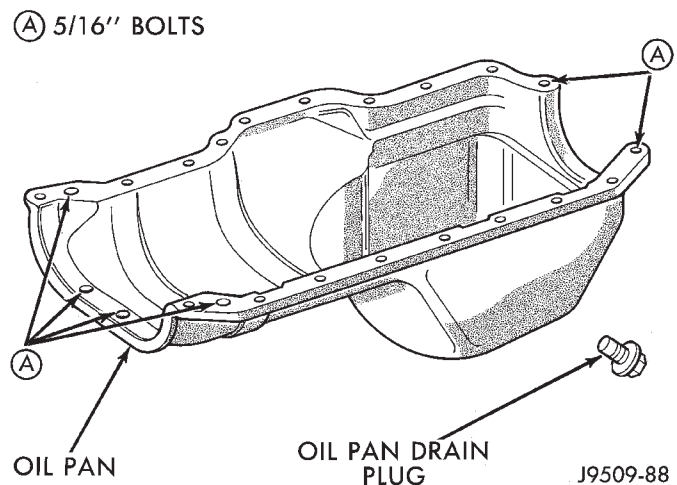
Position of 5/16 inch Oil Pan Bolts
